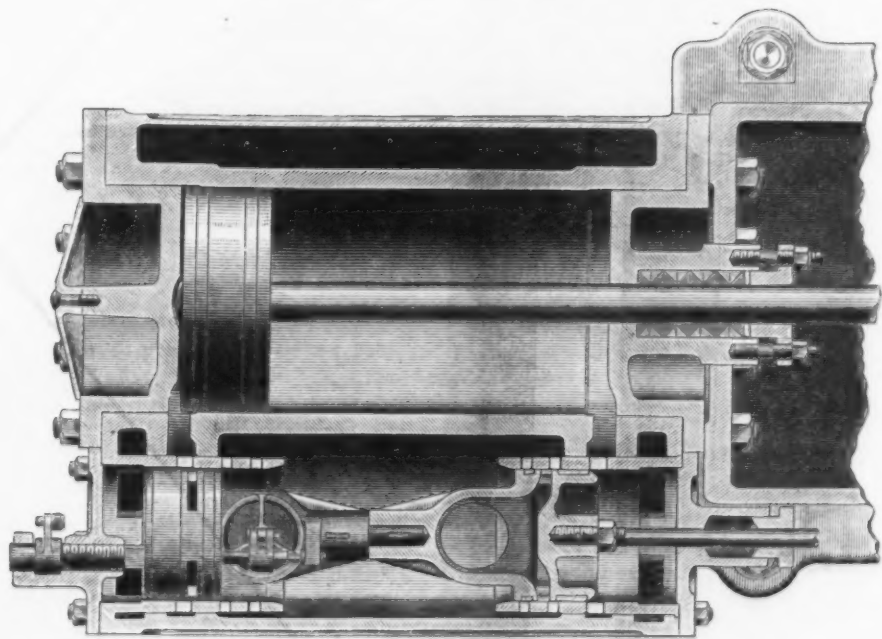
Longitudinal Section of Cylinder and Steam-Chest.
